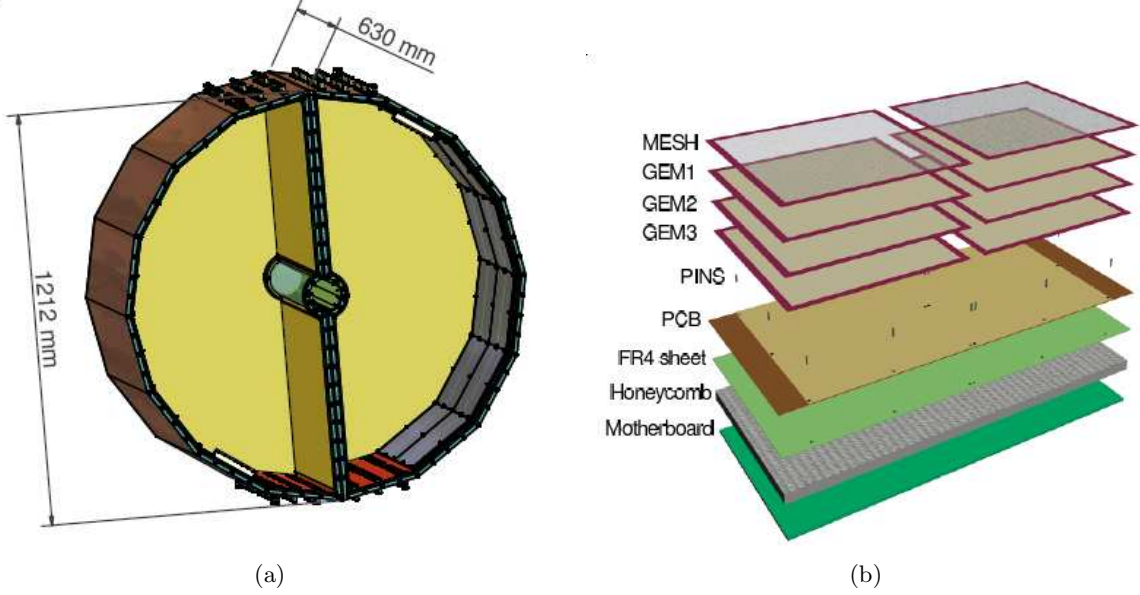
The left panel shows a 3-d view the HBD final design and the right panel shows an exploded view of one panel of the HBD.
